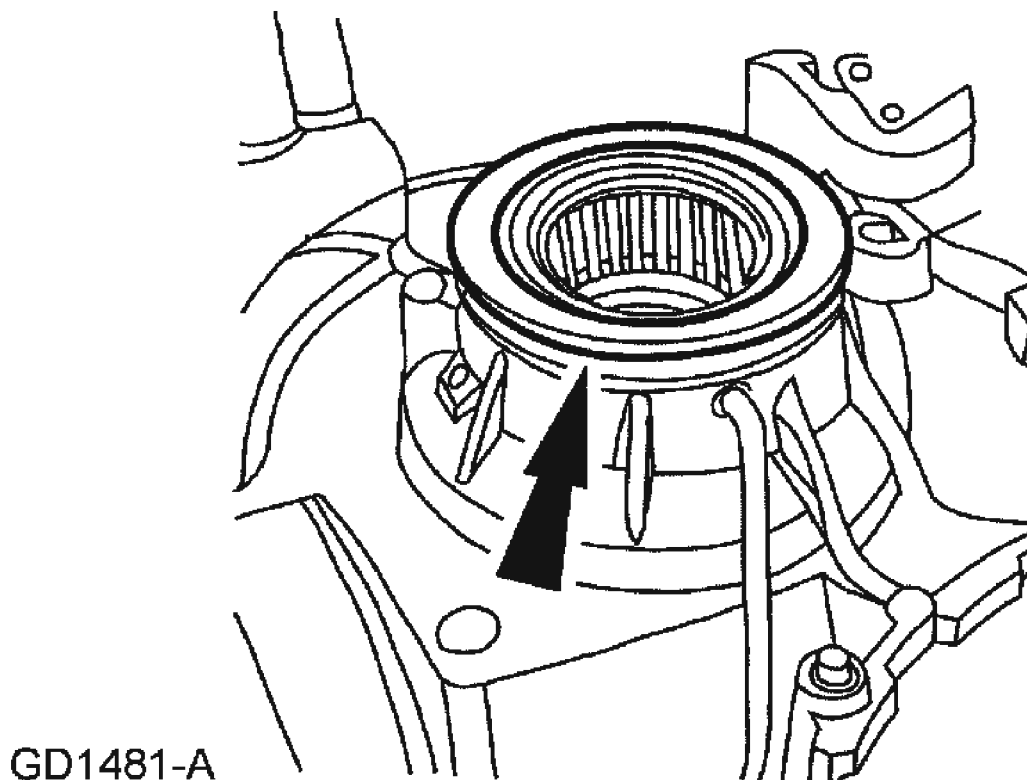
Removing Fluid Filter And Seal Assembly
